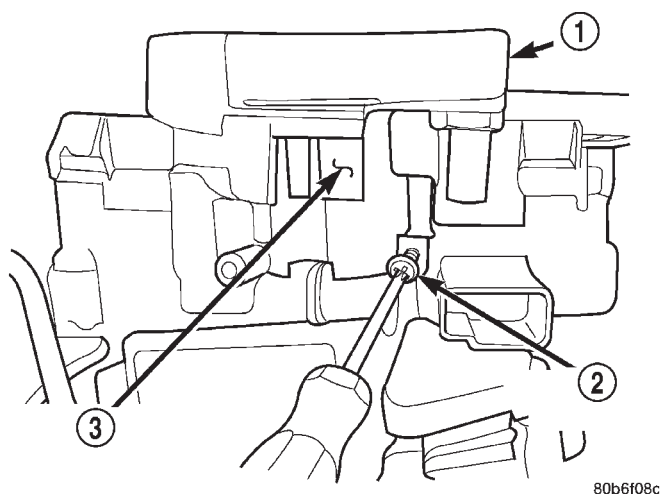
Multi-Function Switch Mounting Housing Screw Remove/Install
